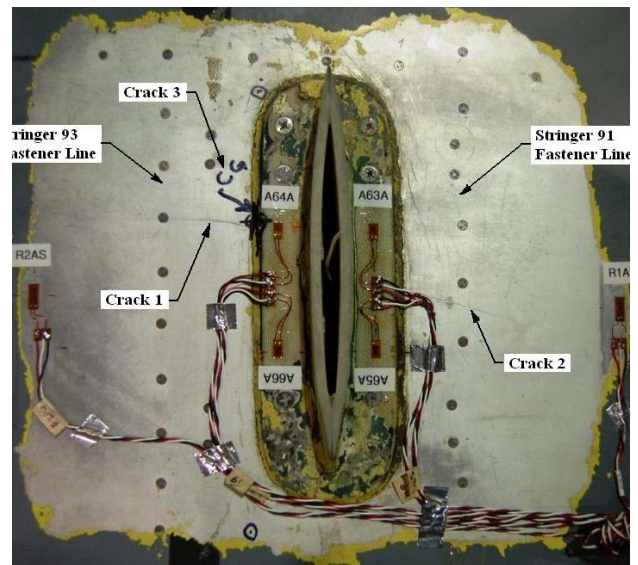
ST-016 flange (cracks 1, 2, and 3) prior to limit load test #1
